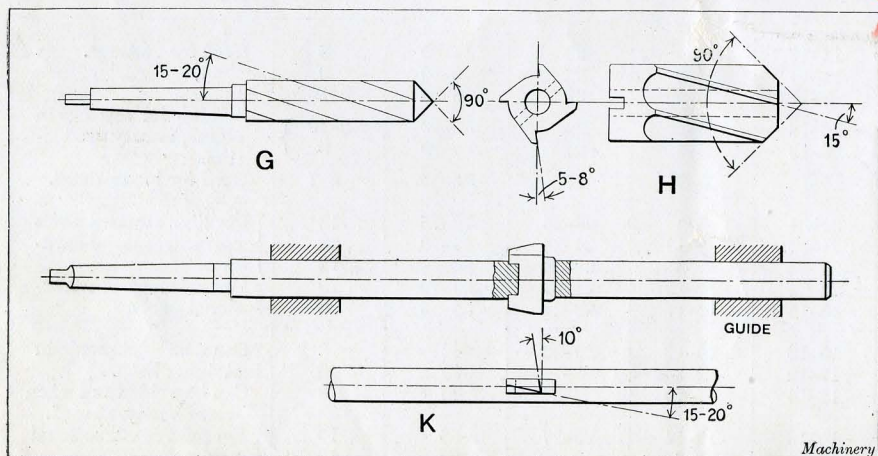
A. Examples of Turning, Milling, and Drilling Tools for Elektron Alloys. G—Drill. H—Shell Drill. K—Counterbore
